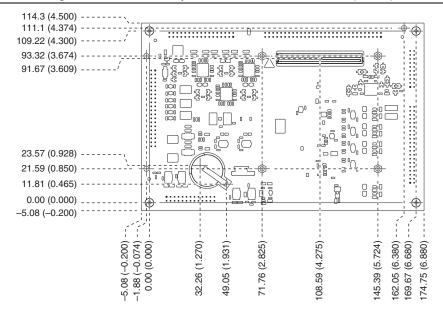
NI 9683 Secondary Side Dimensions in Millimeters (Inches)
